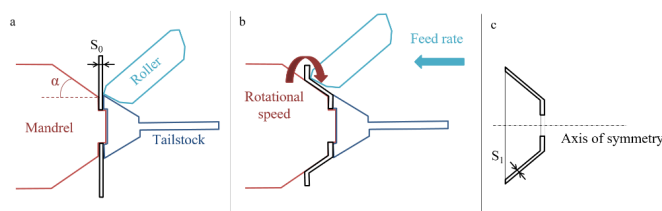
Shear forming principle: (a) Set-up; (b) In operation; (c) Part completed.
